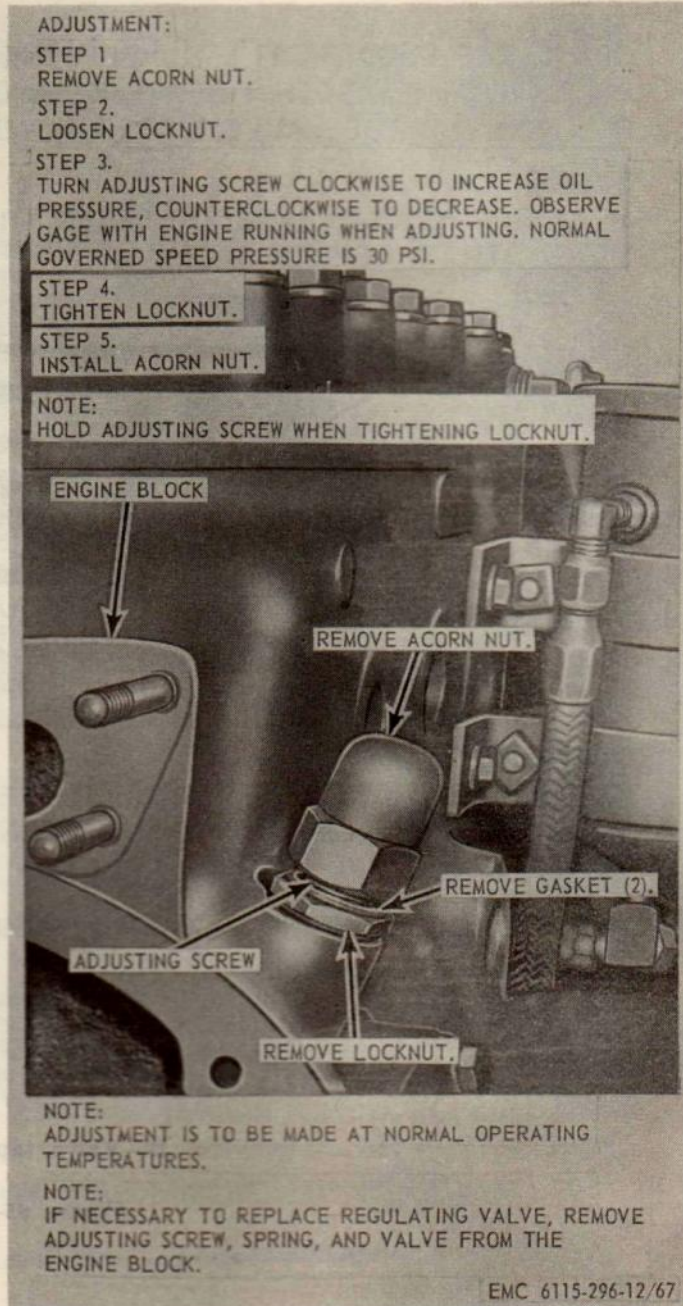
Oil pressure regulating valve adjustment, removal and installation.
